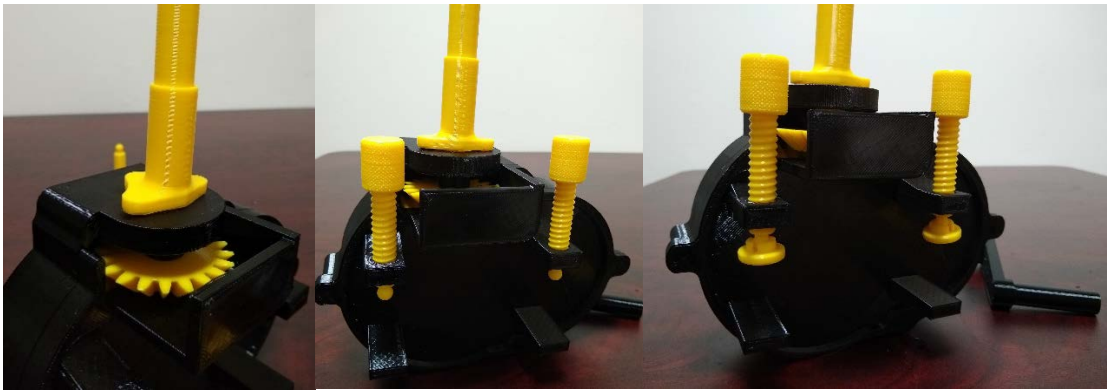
a) Inserting part M and b) assembling Parts K and c) L.
